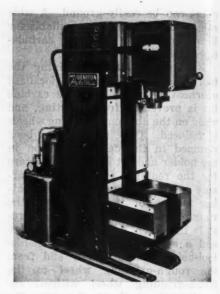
Self-contained Hydraulic Press Consisting of Denison "Packaged" Units Assembled on Frame
